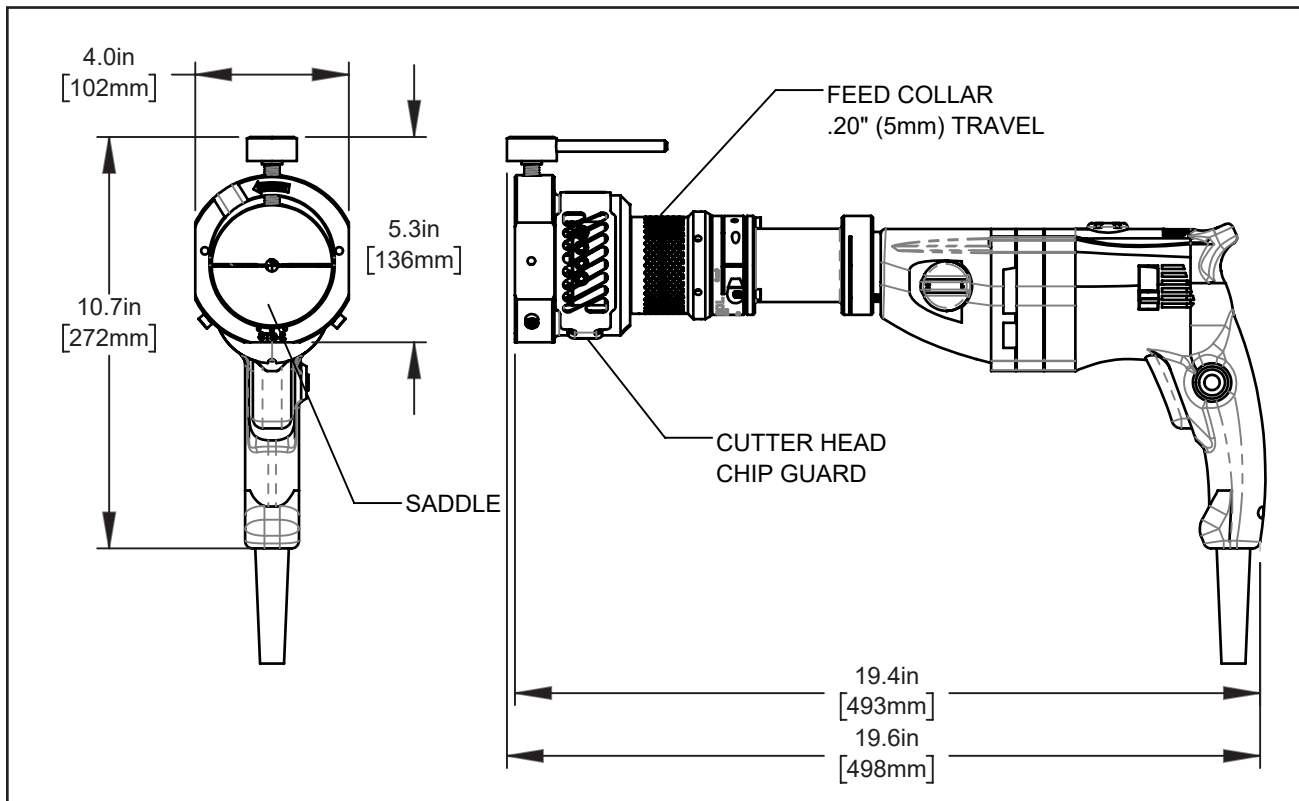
Envelope Drawing STS-2 Corded Motor (115V, 230V)
